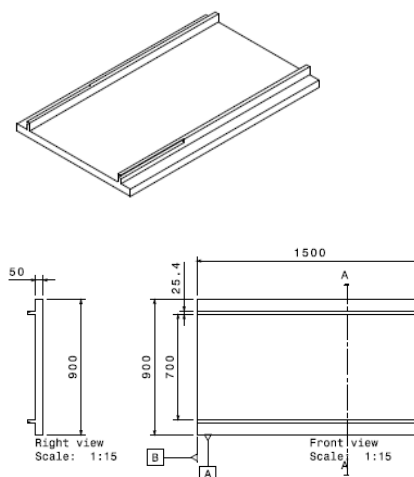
Dimensions of the Base Plate. (All dimensions in mm)
